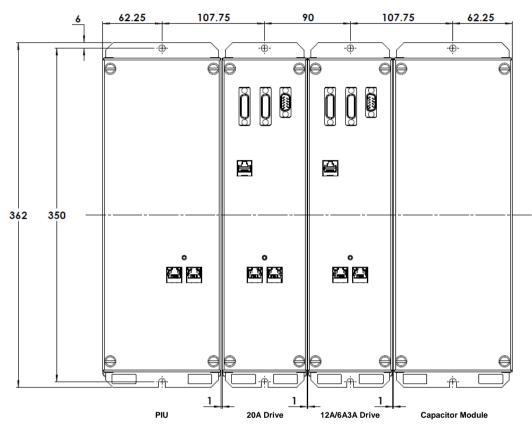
PIU, 20A and 12A/6A/3A drives and Capacitor Module mounting hole positions for Duct, Wall and Recessed mounted Array
